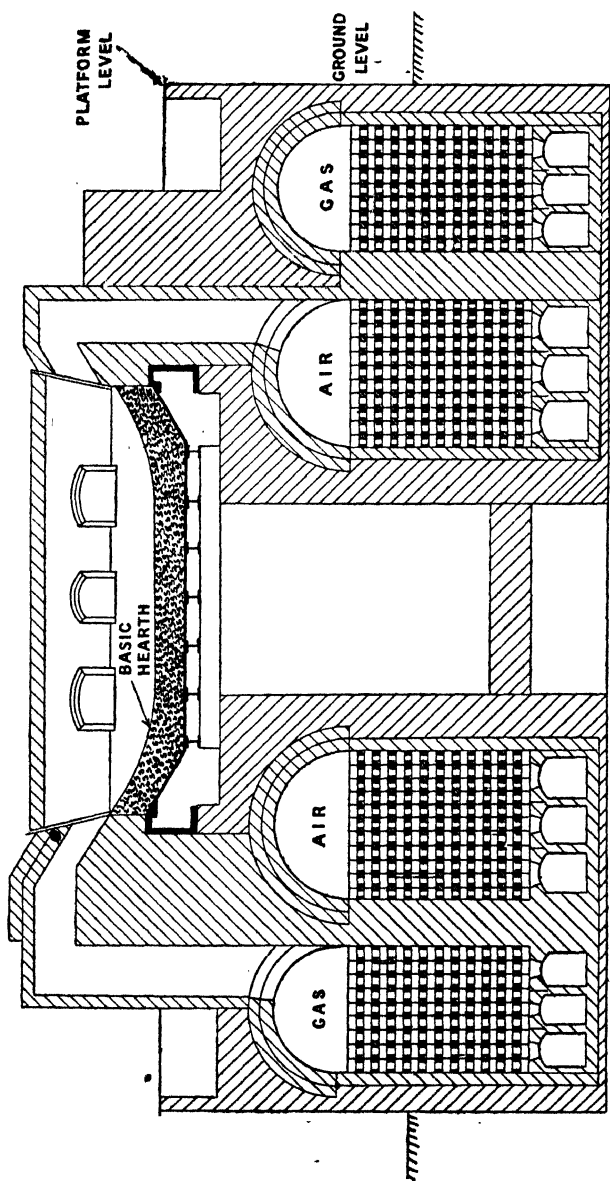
Siemens Basic Furnace: Longitudinal Section.
